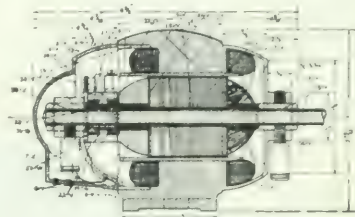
CROSS-SECTIONAL VIEW OF IGNITION DYNAMO.
